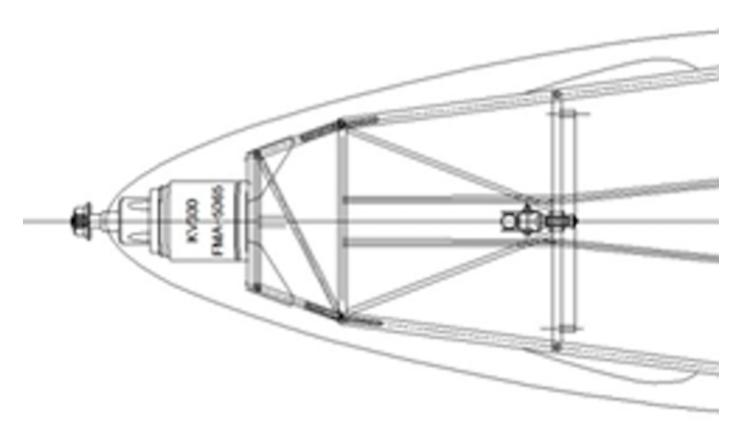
Installation of the Cable Release Mechanism for Aerotowing
